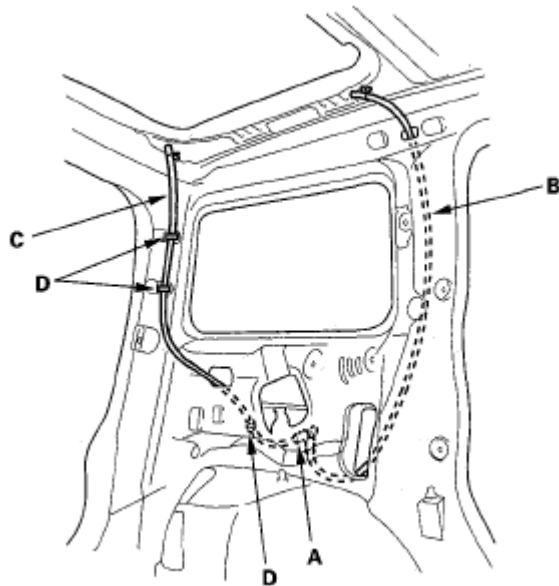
Identifying Front Drain Tube And Rear Drain Tube
